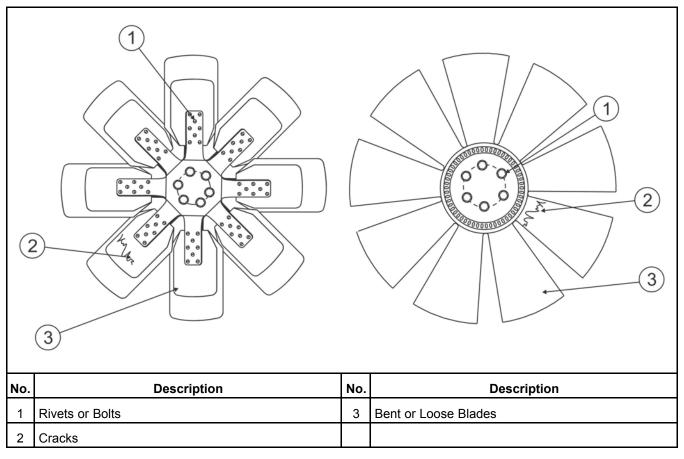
COOLING FAN INSPECTION CHECKPOINTS
